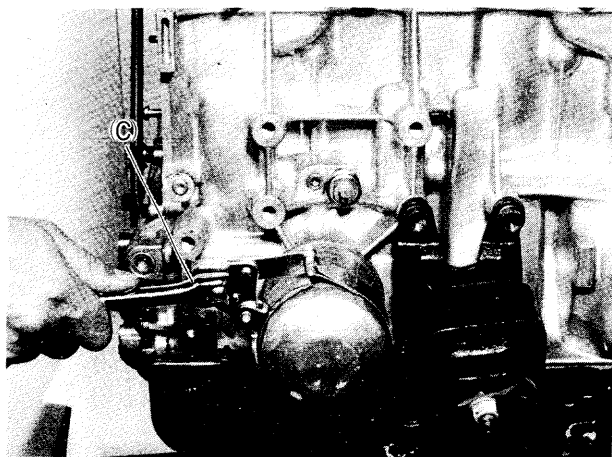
(C) Oil filter wrench (09915-47310)
